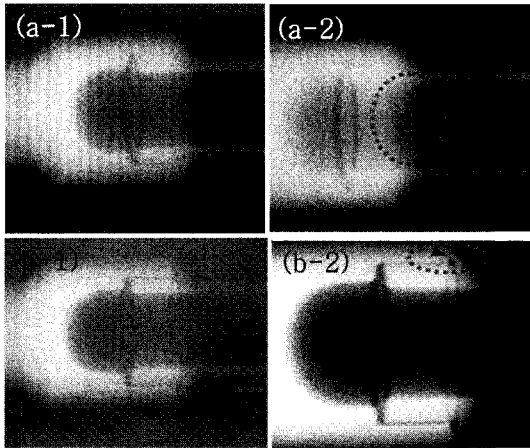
Radiographs showing socket welded small bore pipe before and after Ni; (a) without defect specimen and (b) with defect specimen
